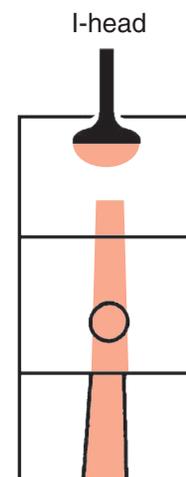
When the valves are in the cylinder head, the engine is known as an I-head engine.
